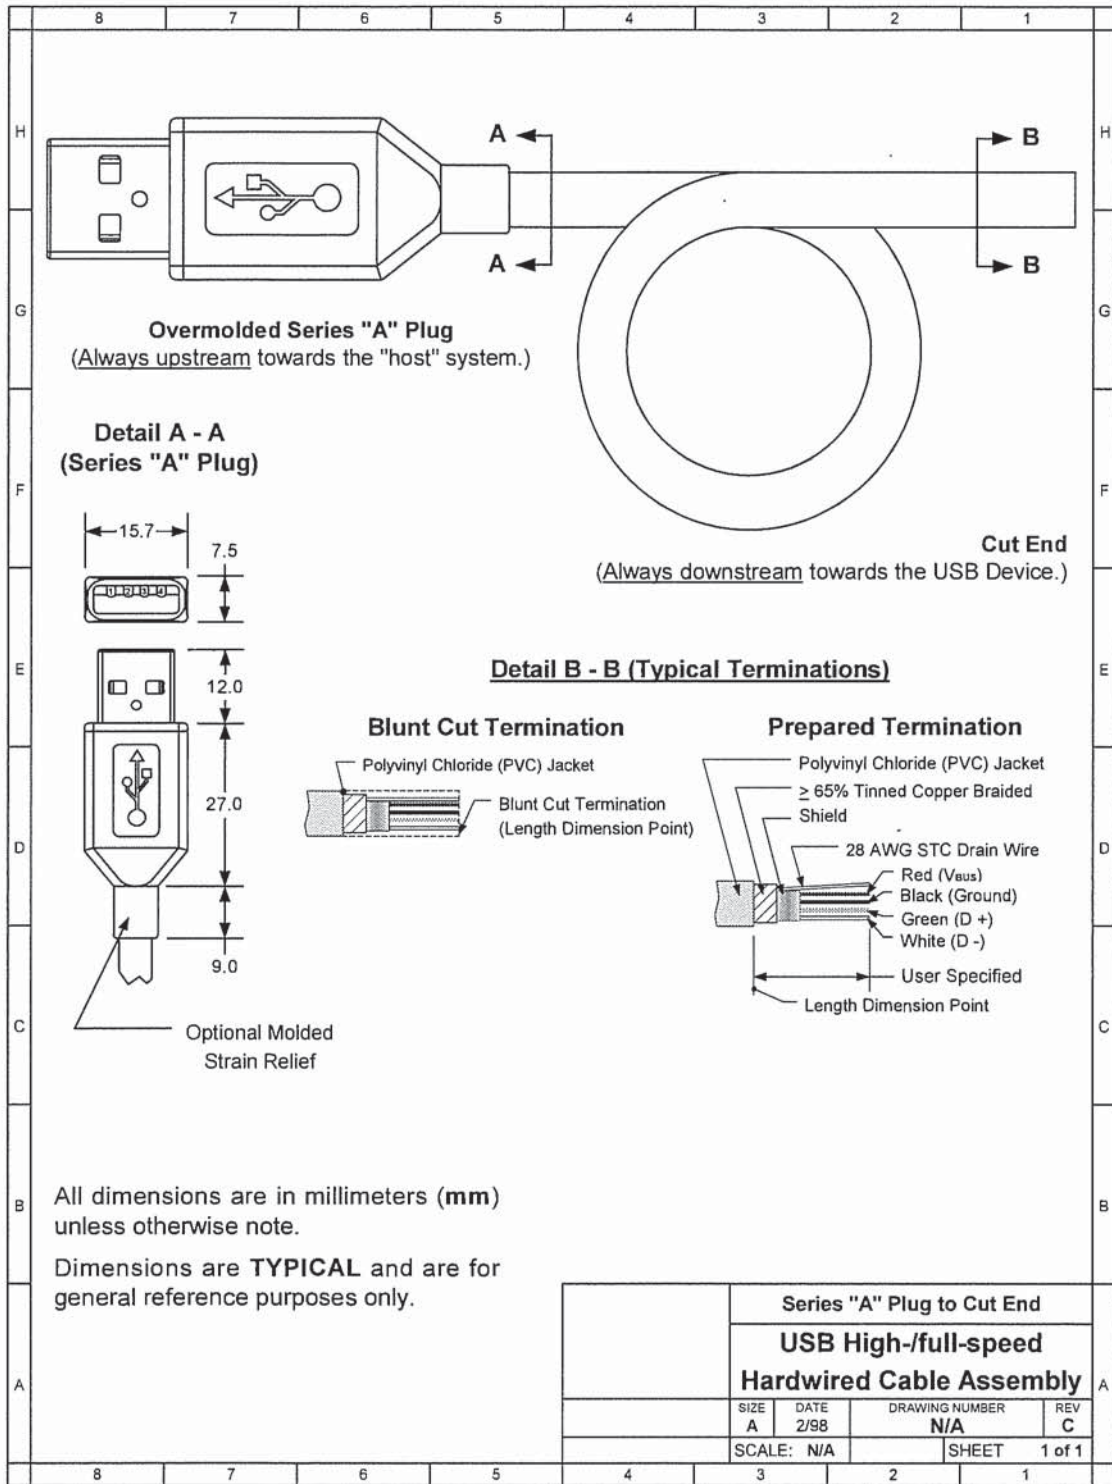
USB High-/full-speed Hardwired Cable Assembly
